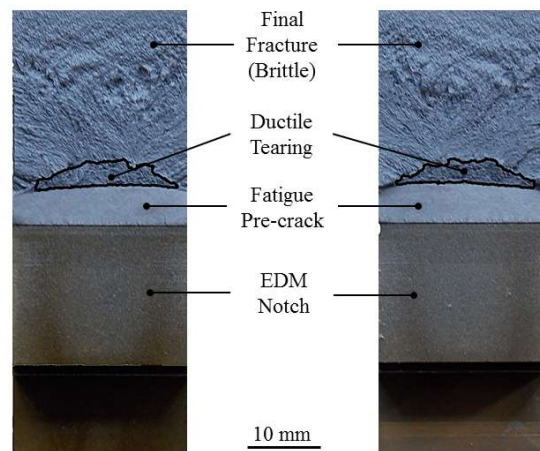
Two fracture surfaces of a Compact tension C (T) specimen after CTOD testing indicating distinctive zones.
